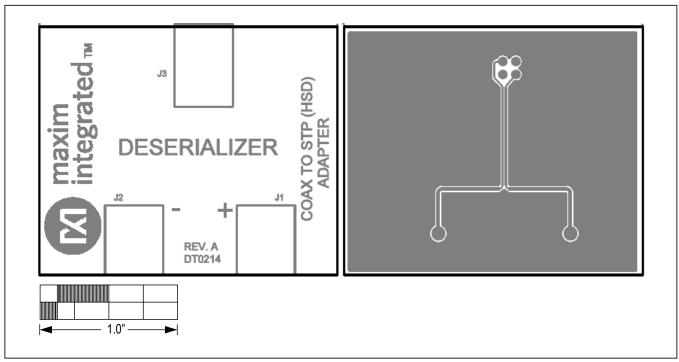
Coax-to-STP Adapter Board (Deserializer)
